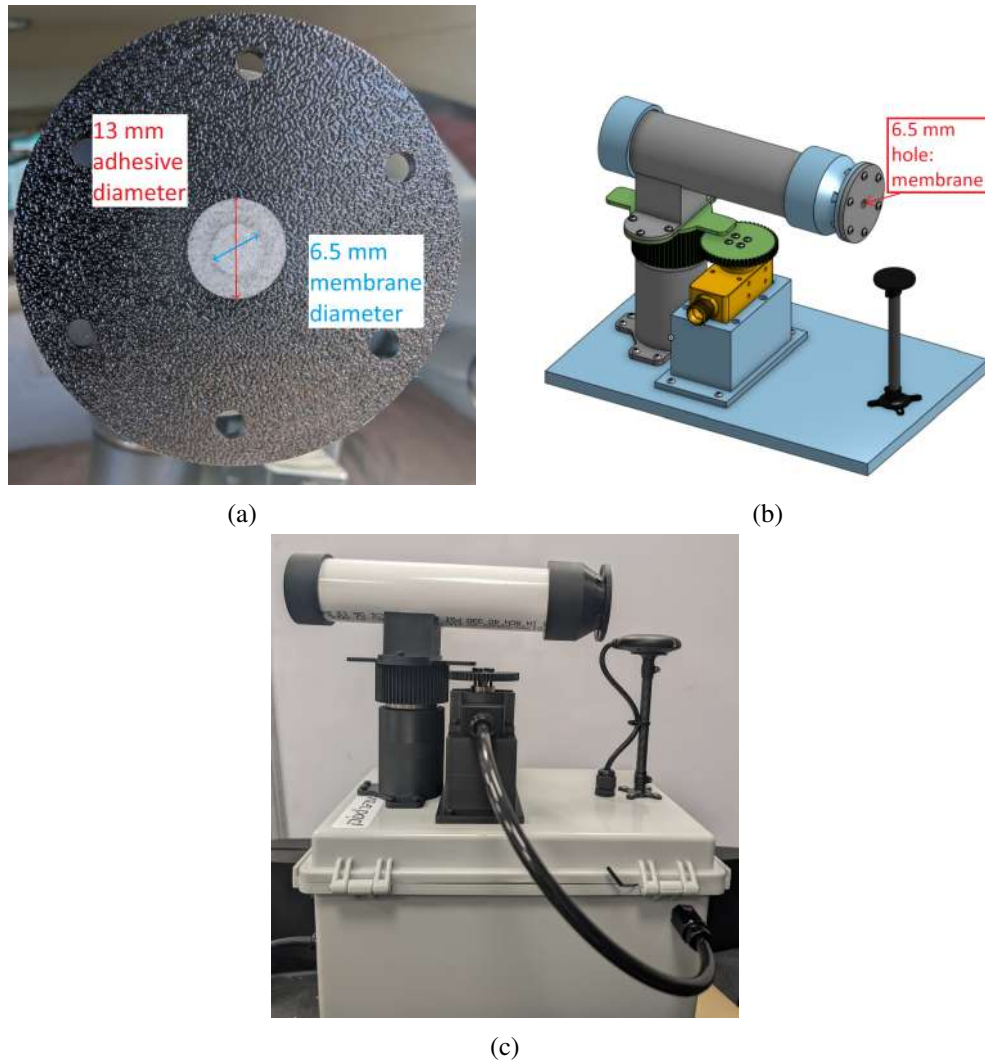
USV rotating microphone mount: (a) Gore acoustic membrane with membrane and adhesive diameters, (b) CAD assembly model for the rotating microphone mount , and (c) final 3D printed design of the rotating microphone mount.
